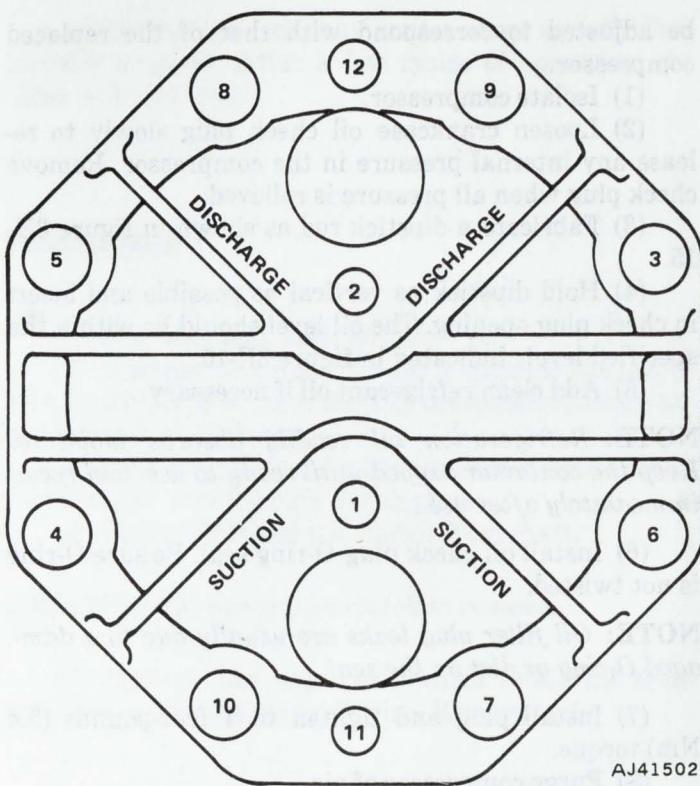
E-14 Compressor Head Capscrew Tightening Sequence AJ41502
